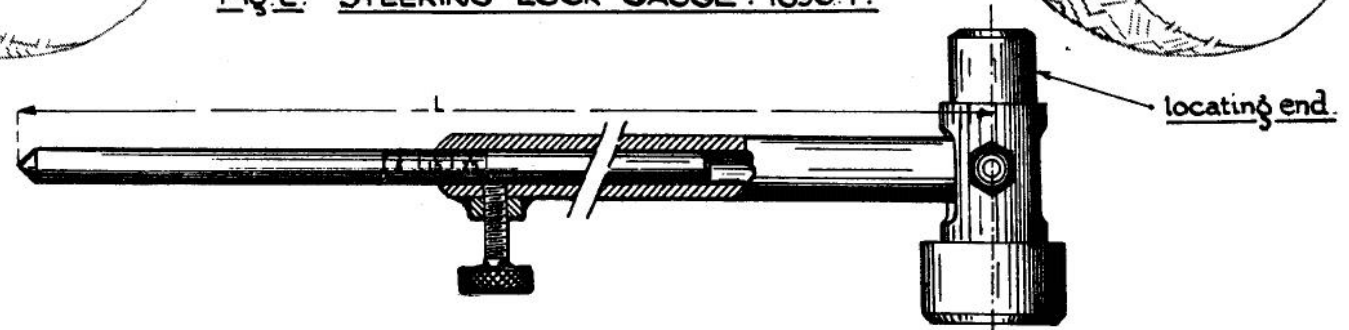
STEERING LOCK GAUGE. 1890.T.
